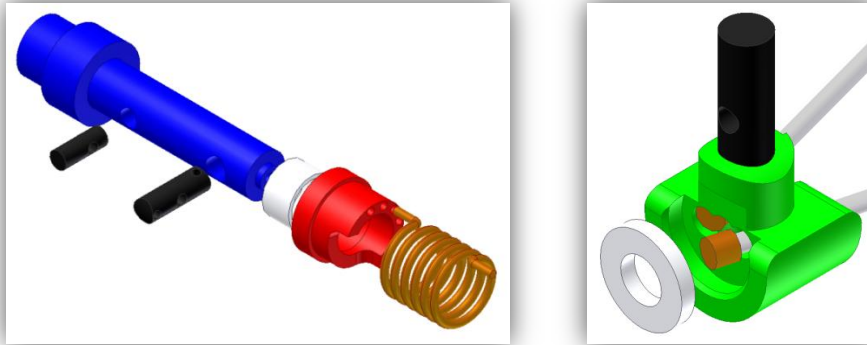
Assembly of Rotor Assembly (left) and Cable Guide Assembly (right)
